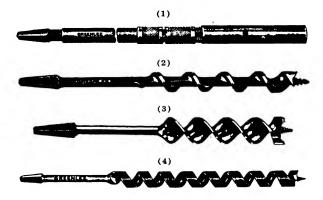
(1) Auger Bit Extension; (2) Single-Spiral, Single-Cutter Bit; (3) Double-Spiral, Double-Cutter Bit; (4) Single-Spur Car-Bit or Ship-Auger
